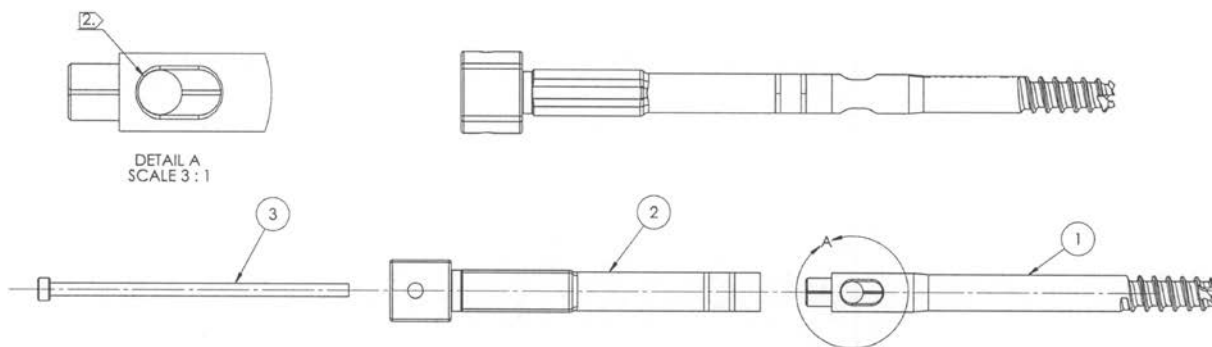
Manufacturing schematic for assembly of dynamic prototype device and nail guide.
